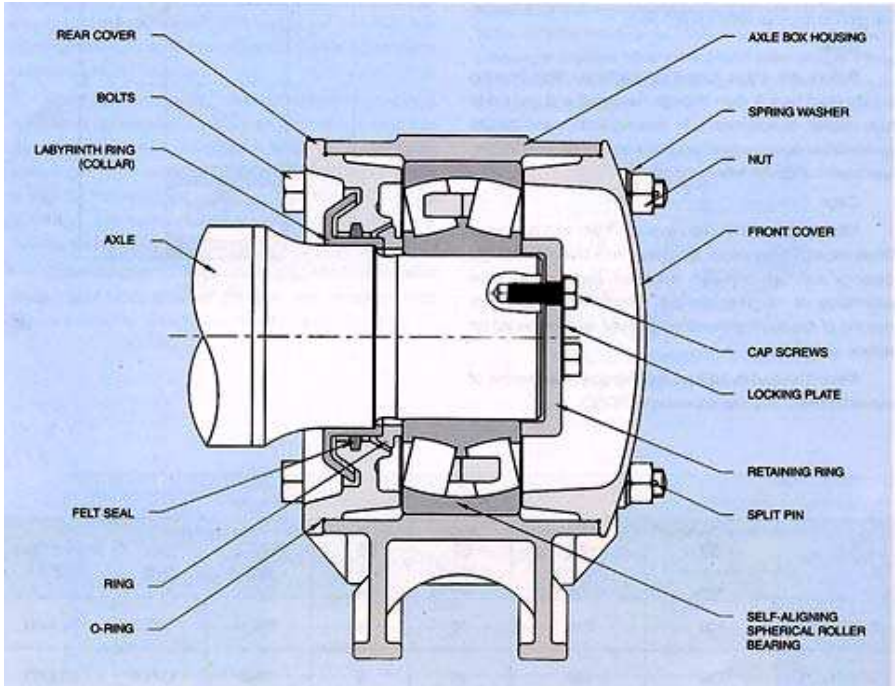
Spherical Roller Bearing and Axle Box Assembly
